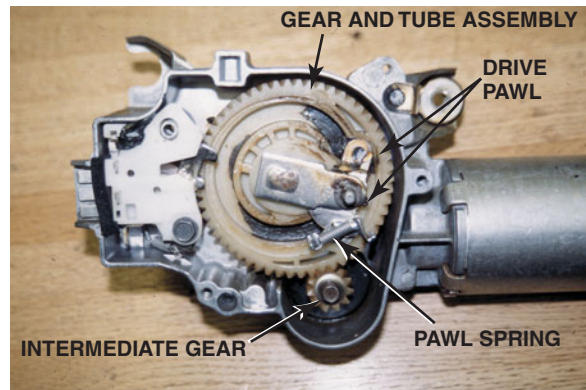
A typical wiper motor with the housing cover removed. The motor itself has a worm gear on the shaft that turns the small intermediate gear, which then rotates the gear and tube assembly, which rotates the crank arm (not shown) that connects to the wiper linkage.
